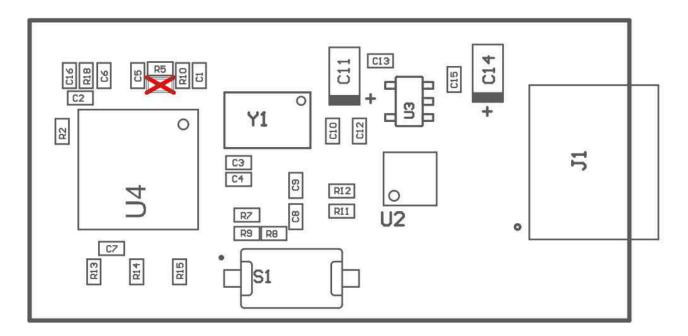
PCB Bottom-Layer Assembly Drawing
